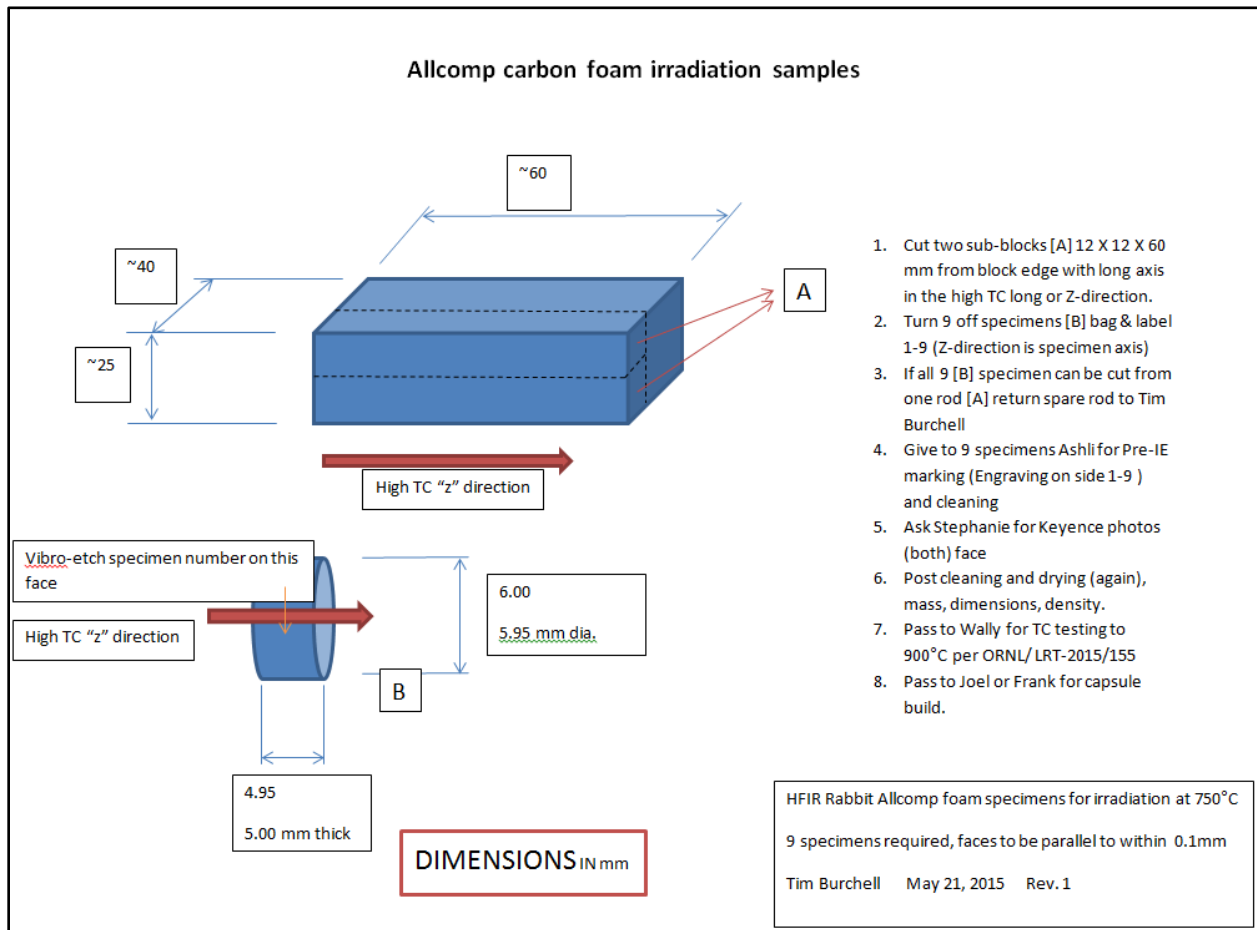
Cutting drawing for the Allcomp foam block and irradiation specimens
